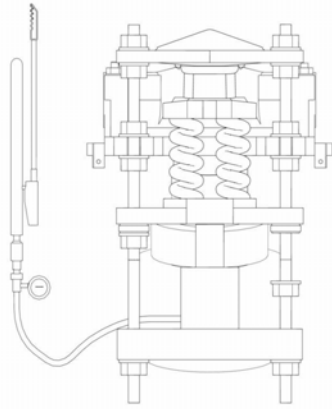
Local spring pressure assembly with a gage being utilized on a RS Bowl mill journal
